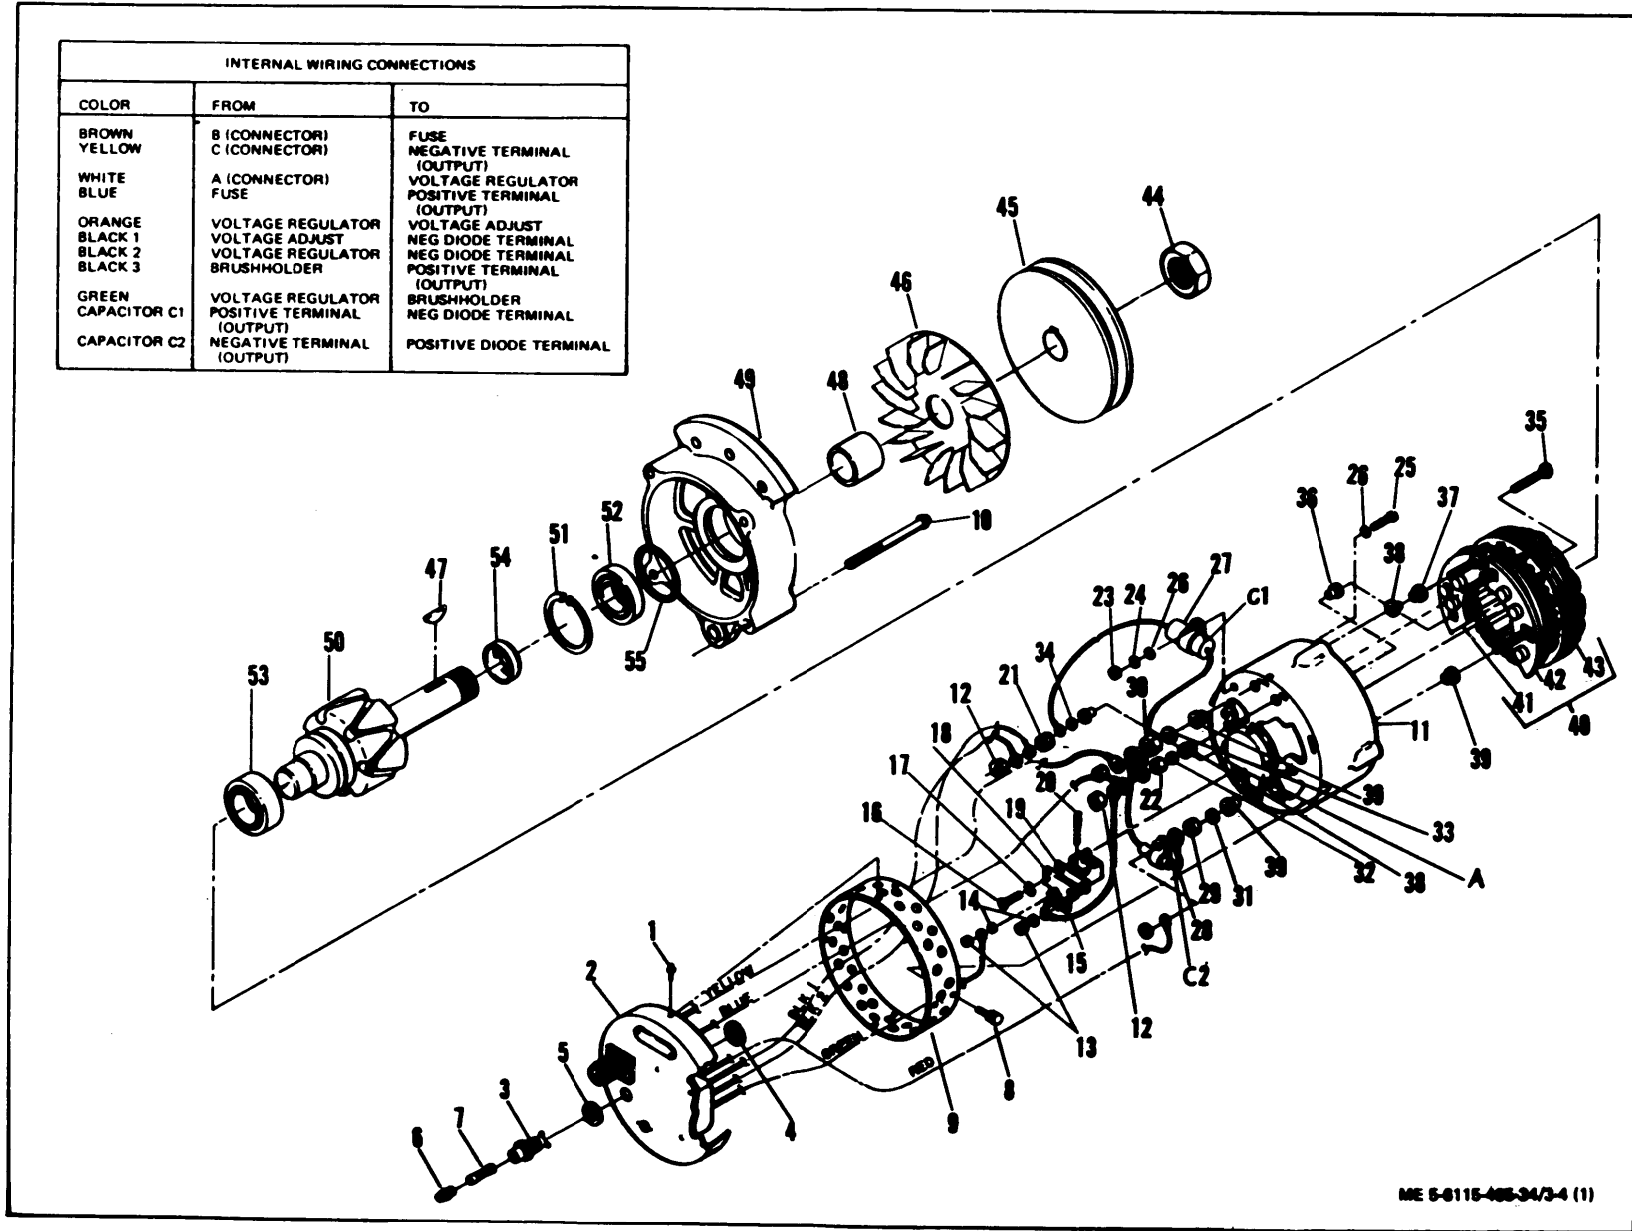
Alternator Assembly, Exploded View (Sheet 1 of 2)
